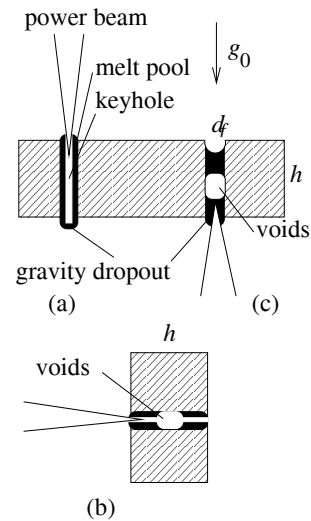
Typical positions by single-pass power beam welding: (a) flat, (b) horizontal (or vertical) and (c) overhead.
